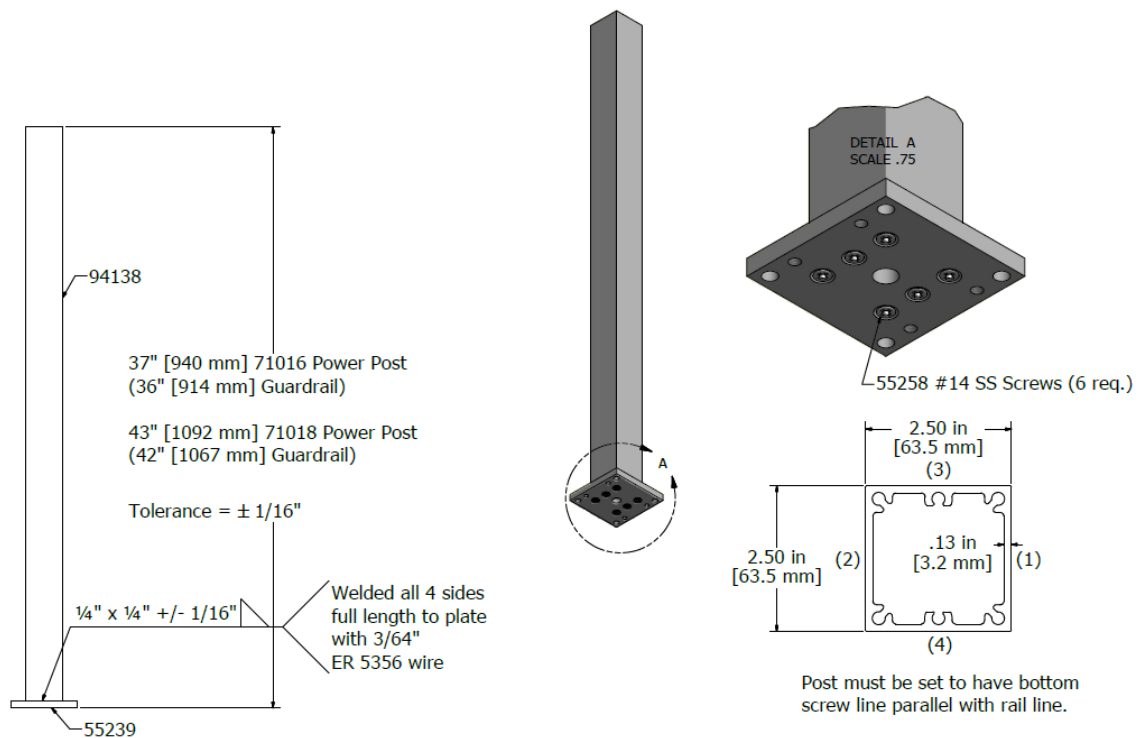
2-1/2" POWER POST ASSEMBLY
